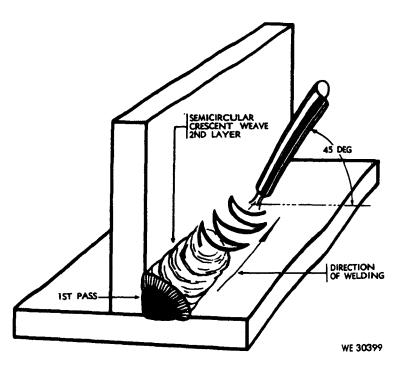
Weave motion for multipass fillet weld.
